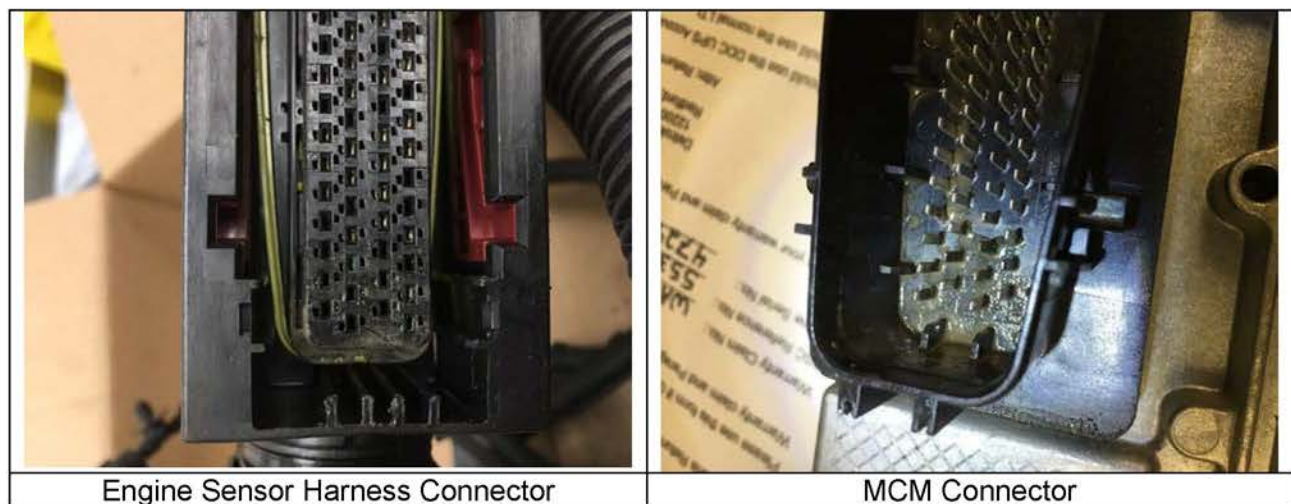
Example of Damaged Connection at MCM 120-Pin Connection
